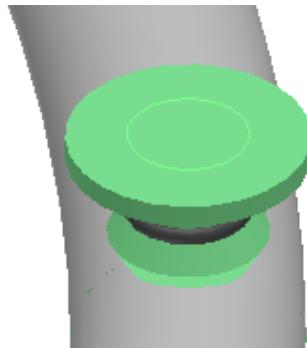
26: Finished View of Flange on Weldolet
